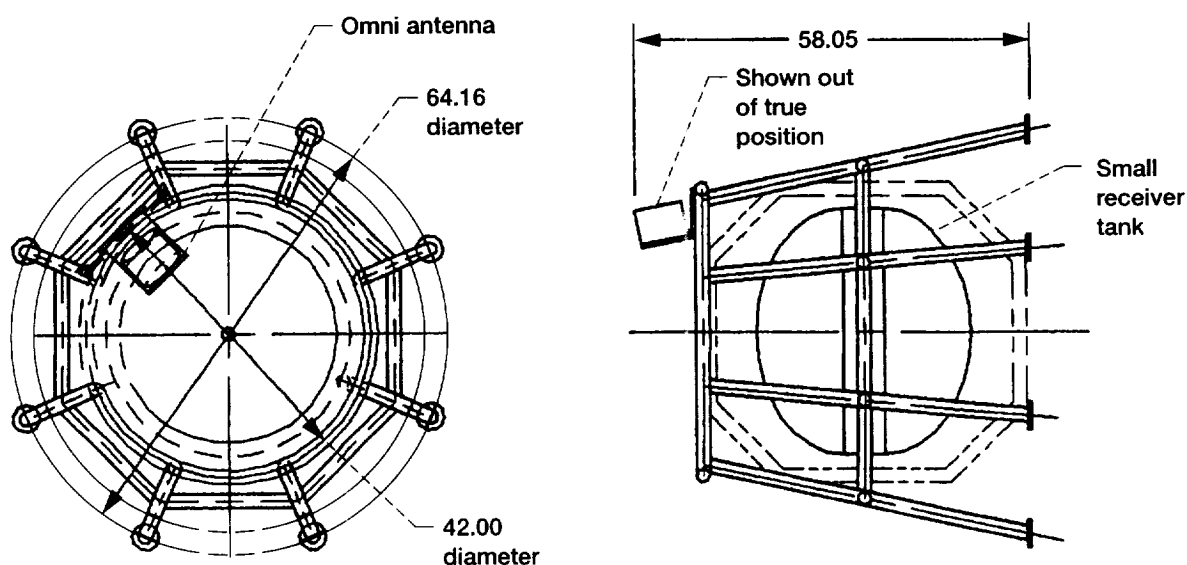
Small receiver tank module. Dimensions are in inches.
